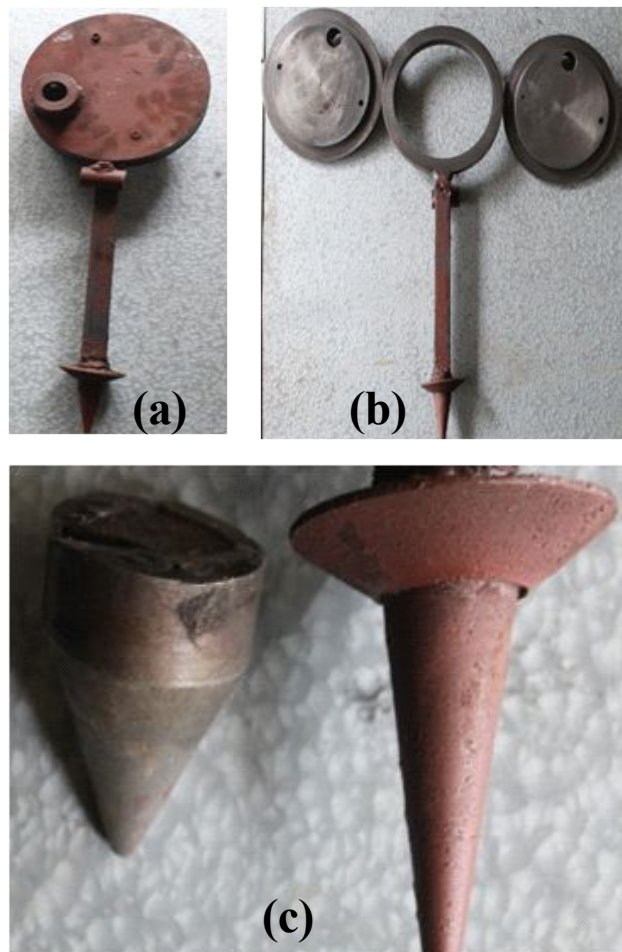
Punch wheel assembly : (a) Punch wheel assembly as a single unit (b) Dismantling of punch wheel assembly and (c) two types of punches
